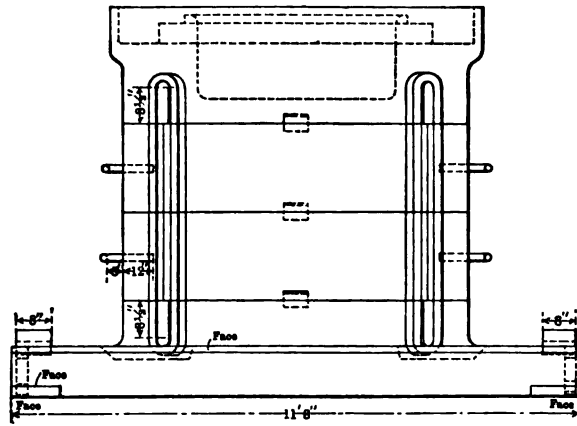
ANVIL BLOCK OF STEAM STAMP.
